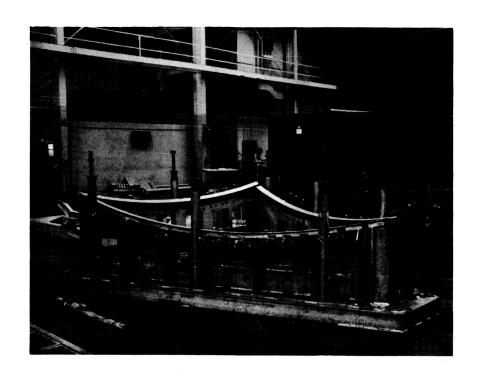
ROUTING APEX GORE AND WELDING FITTINGS
